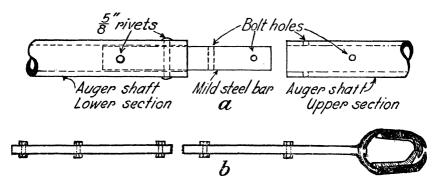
Coupling and shaft. a, A solid coupling for shafts made in sections; two bolts are removed to take the shaft apart; b, the bolt shaft, one of the most useful shafts we have used. This shaft stands more rough use than any other shaft tried. Permanent bolts or rivets transfix the shaft at 3-foot intervals. The turning handles never damage this shaft. The bolt heads act as lugs for the handles to push against.
